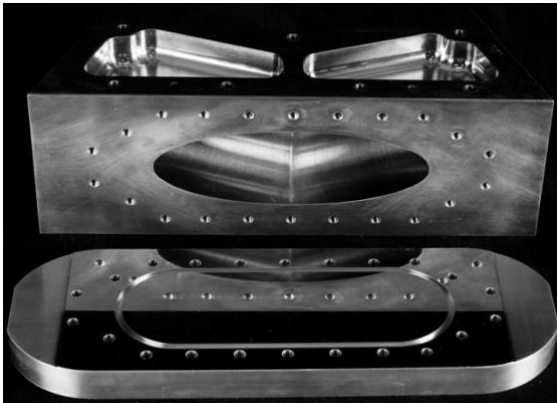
Prototype 140° miter bend with a 63.5 mm ID.
